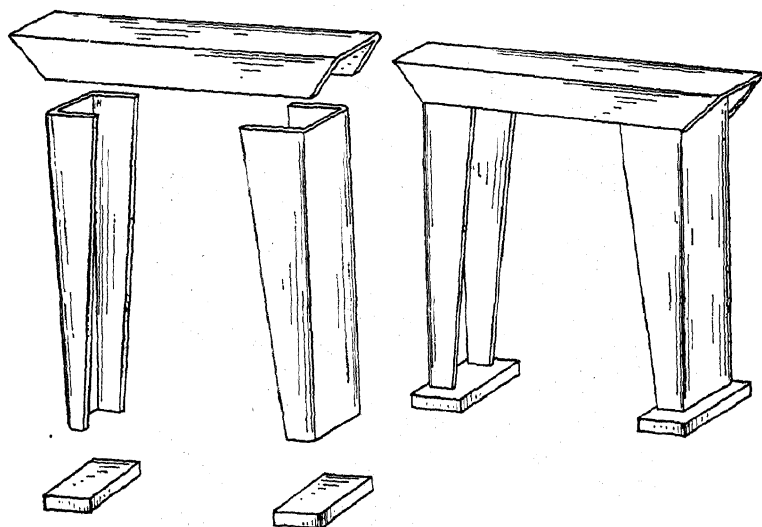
By using a square shear and bending brake these parts can be prepared for the support shown. Scrap loss is negligible with this strong, light weight construction.
